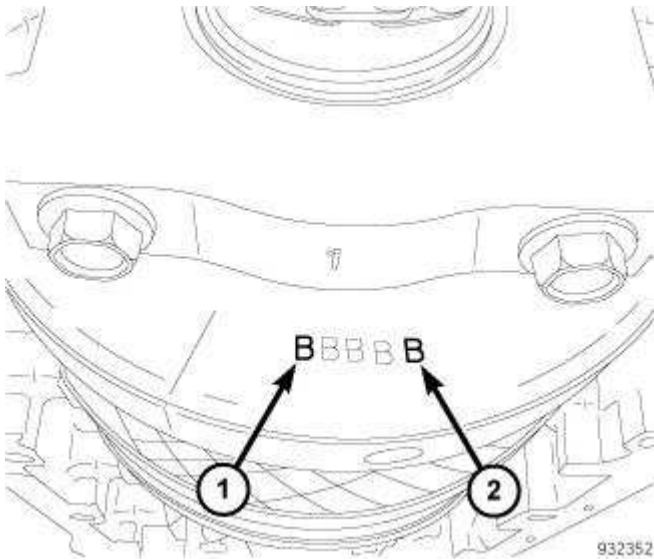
Crankshaft Counterweight Stamped Grade Identification Marks
